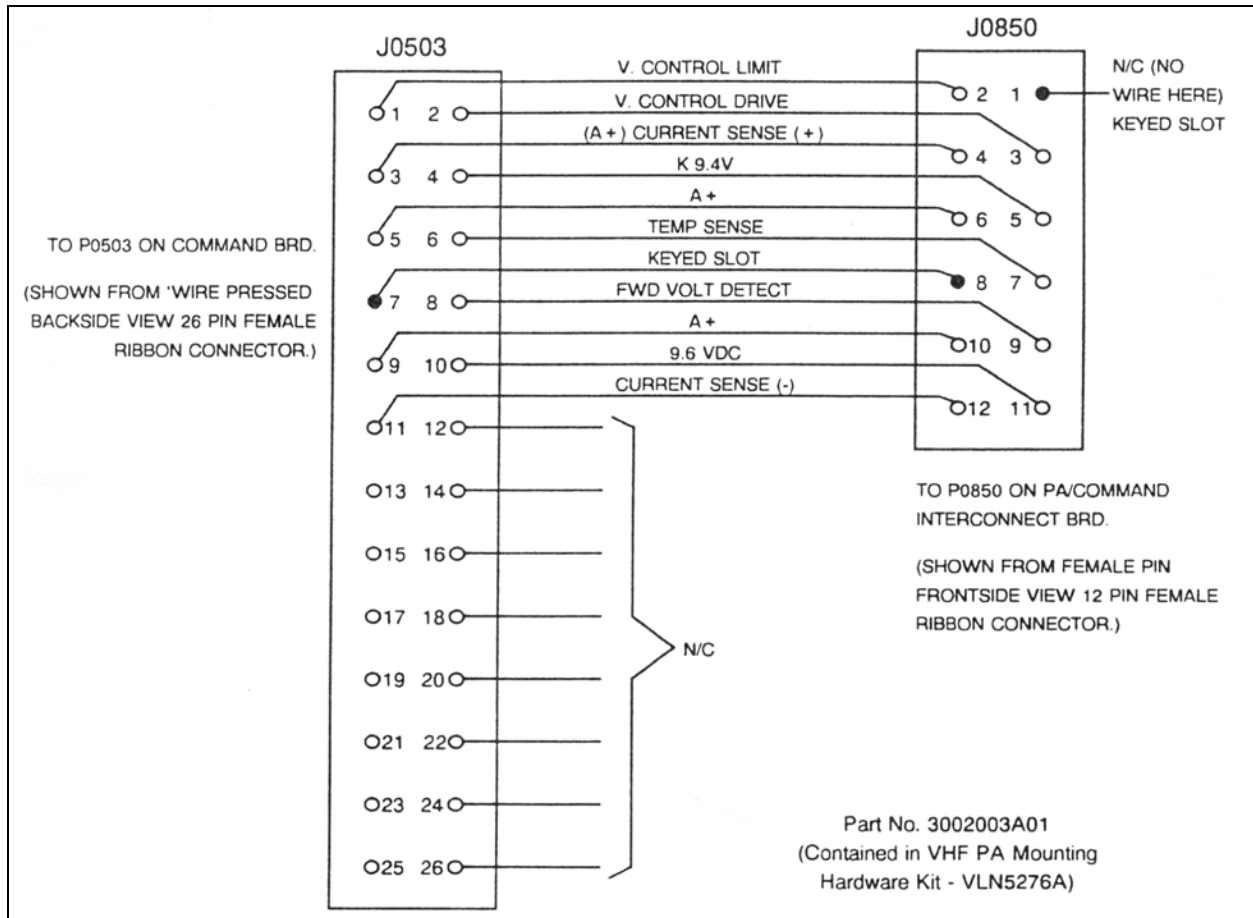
Command Board /RF PA Ribbon Cable Assembly
